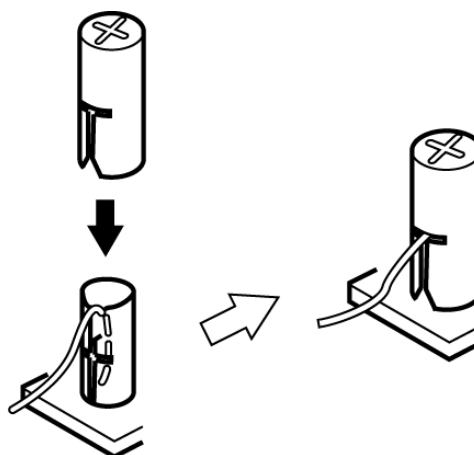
Attaching Cables to the AD(A)-R() Unit
